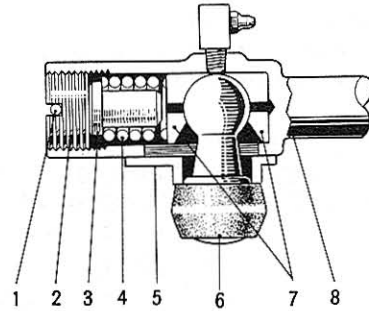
Tie-rod & Steering Relay Rod G2446 G2431
